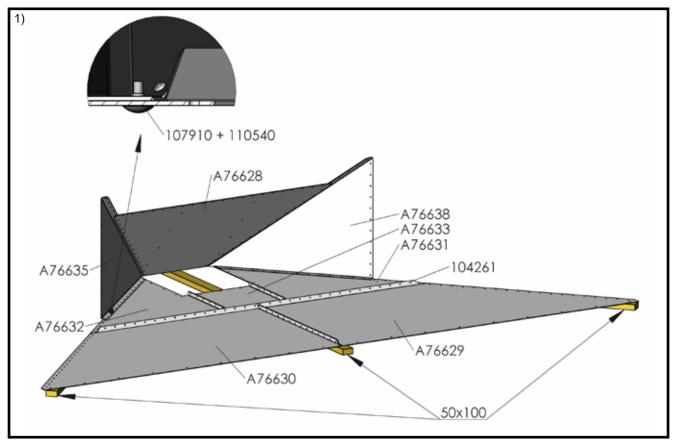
Place the countersunk bolts with their caps pointing outward (against the concrete surface). Provide the long holes with a fender washer. Tighten all bolts.
